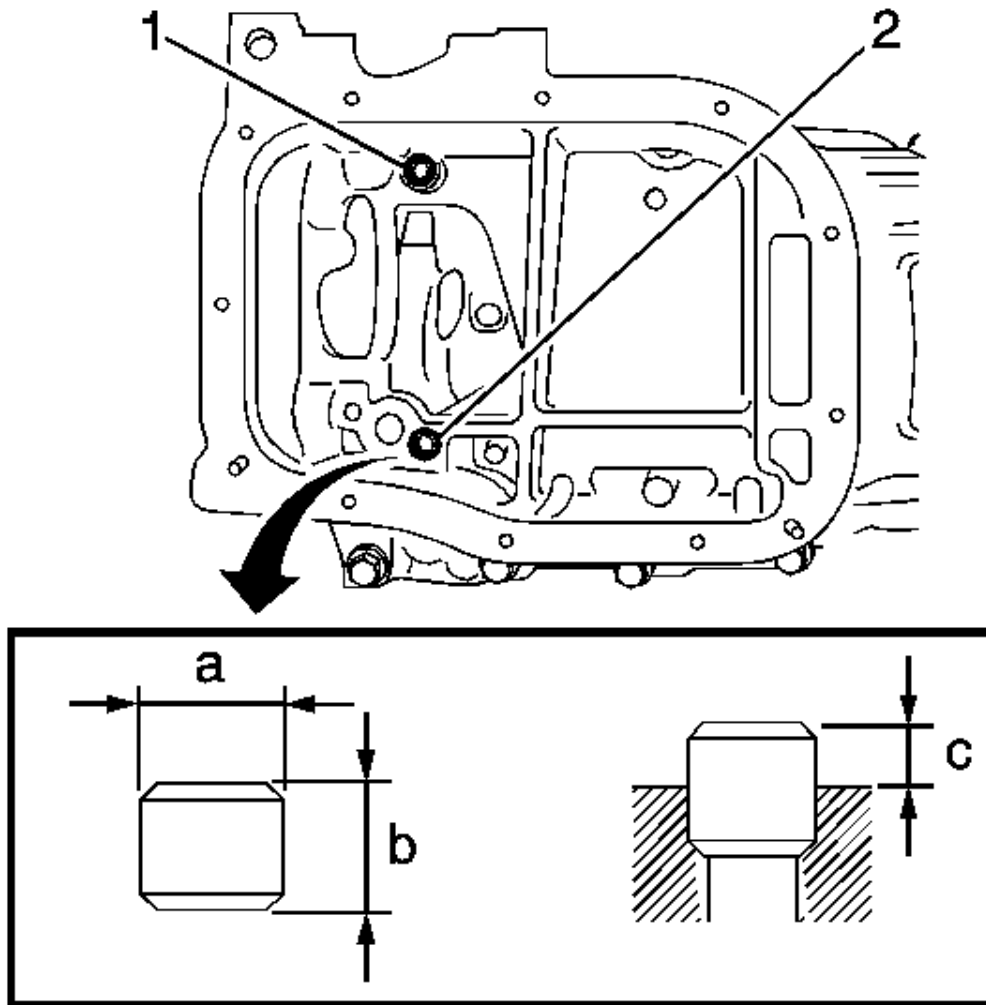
View Of Ring Pins-To-Crankcase Installation
